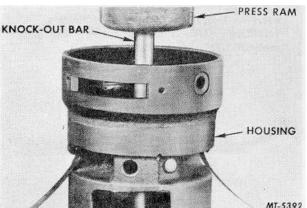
Pressing Out Lower Bushing Using Knock-Out Bar
